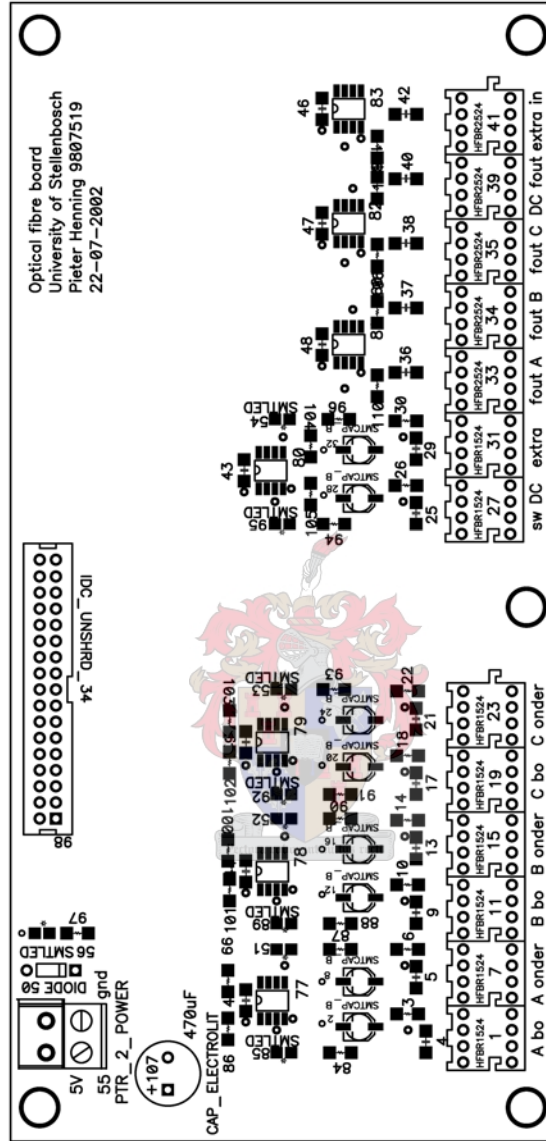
PCB layout of Optical Driver Board TOP silkscreen and pads
